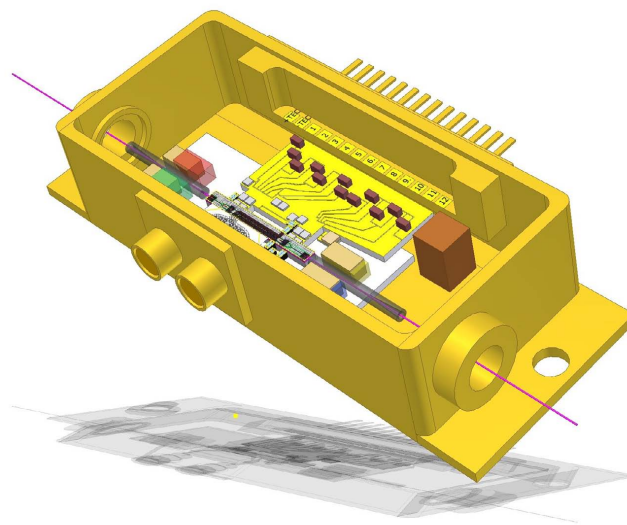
CAD drawing of equipped IQM Kyocera module.
